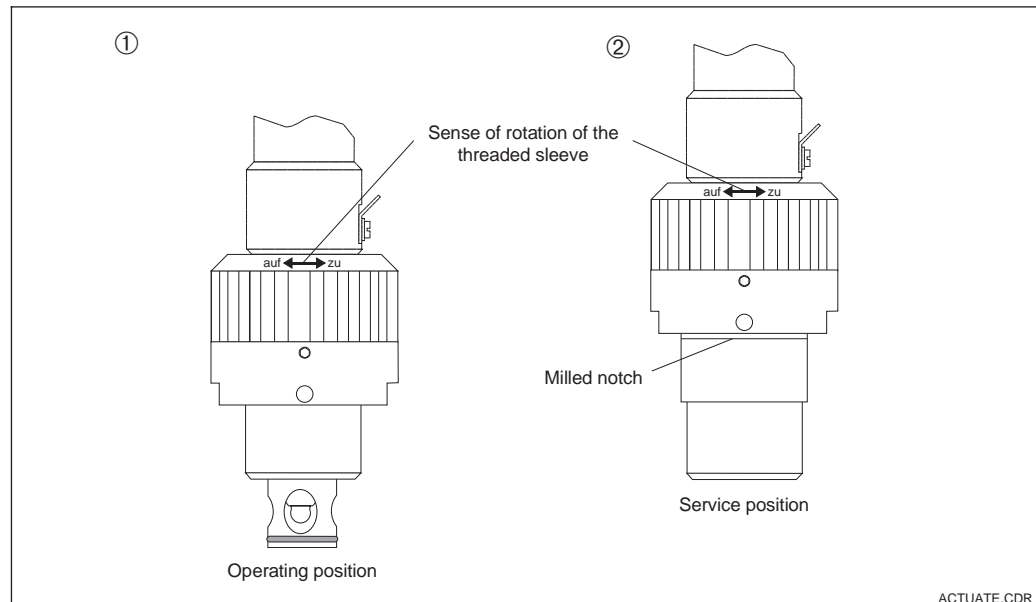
Actuation of the Probfit CPA 460 assembly
